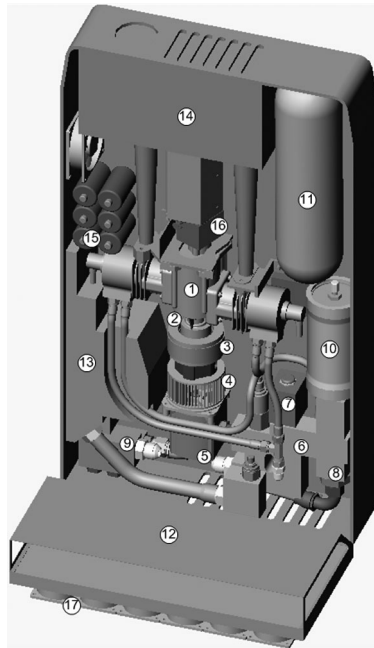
HEPU physical layout. Engine (1); shaft (2, not visible); alternator (3); cooling fan (4); gear pump (5); manifold (6); solenoid valve (7); filter (8, not visible); pressure transducer (9, not visible); accumulator (10); nitrogen tank (11); heat exchanger (12); hydraulic reservoir (13); muffler (14); batteries (15); carburetor and throttle (16); heat exchanger fans (17). Internal baffling around engine is not shown for clarity.
